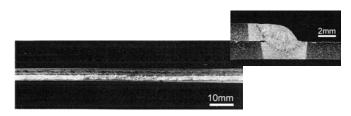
An MX-100T (1.2mmØ) lap fillet weld made on 2mm thick steel sheets in horizontal welding (80 Amp.)
